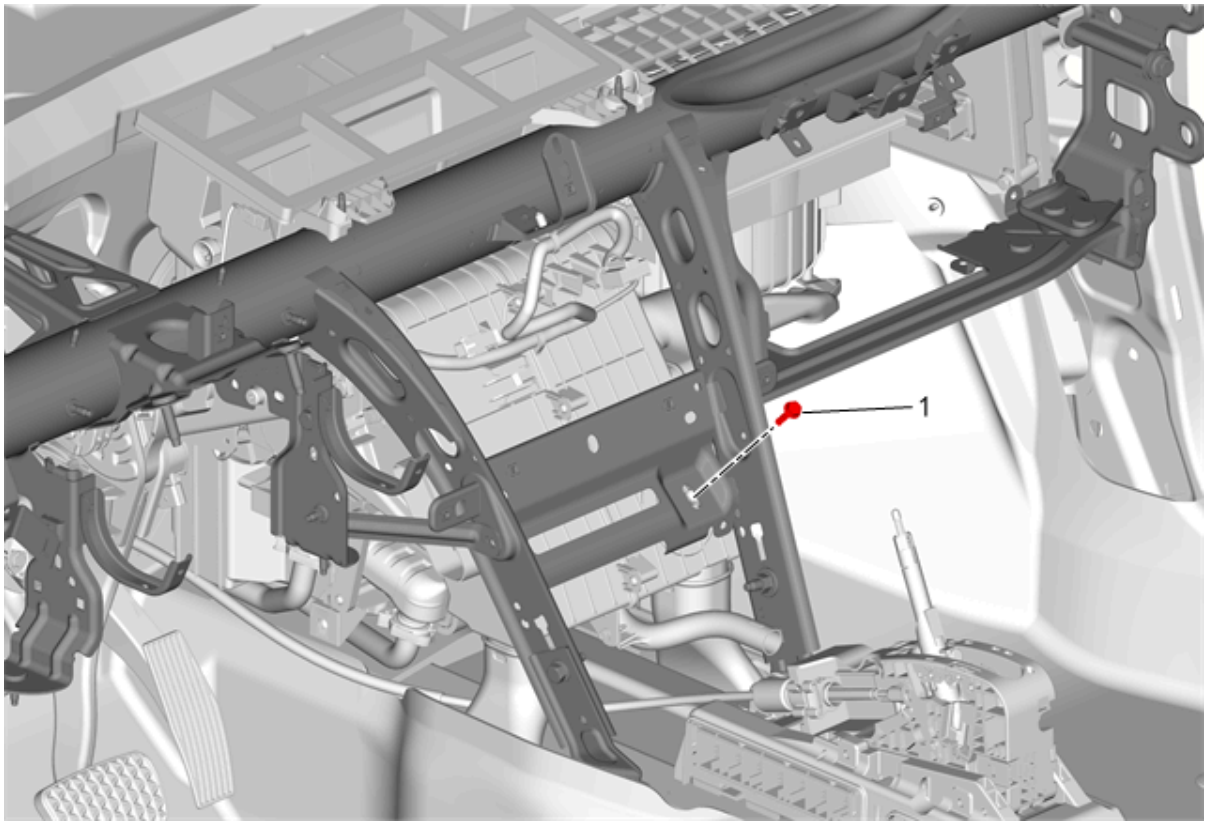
Heater and Air Conditioning Evaporator Module Bolt
